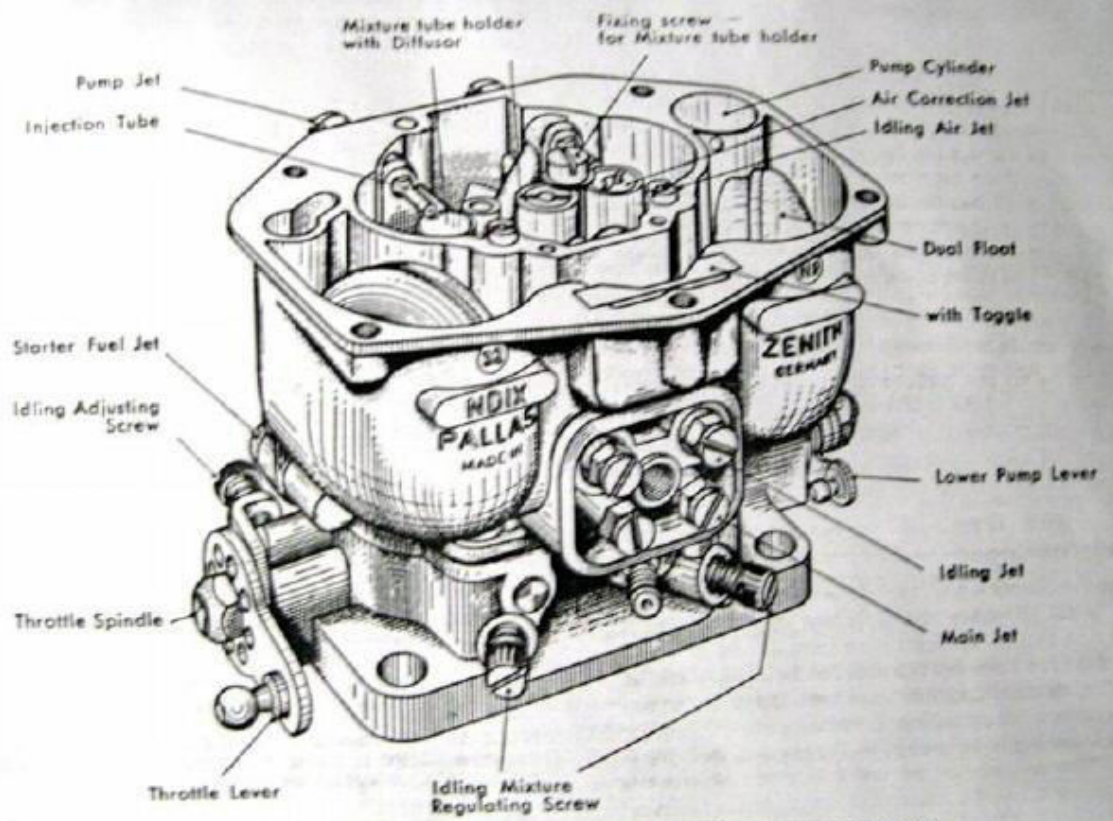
11 View of Zenith carburetter 32.NDIX with cover removed
